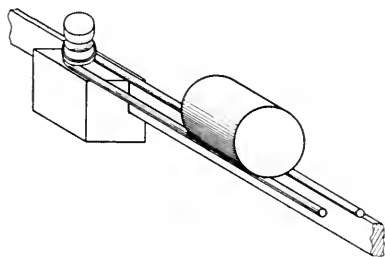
Detail drawing of the speed-control for bugs or semiautomatic keys.
